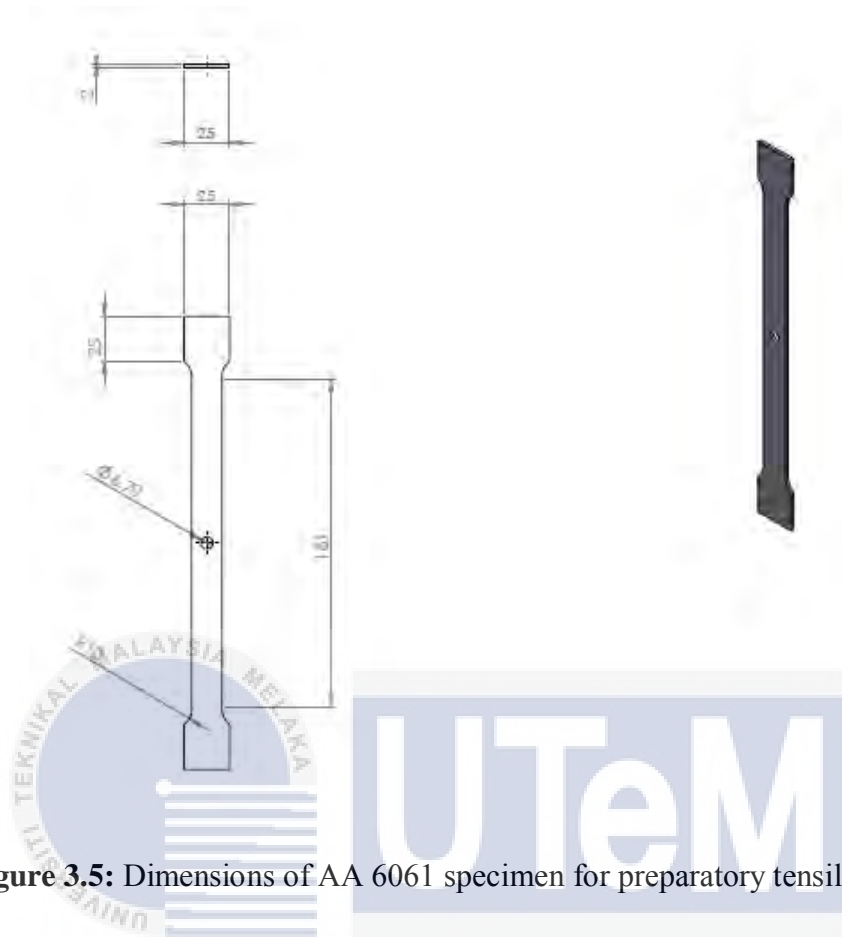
Dimensions of AA 6061 specimen for preparatory tensile test
